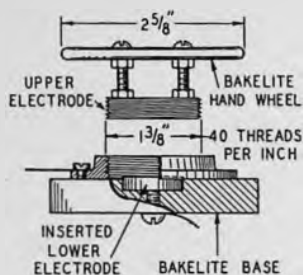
Crystal holder for permitting smooth and rapid frequency-shifting. The dimensions may be changed at will. The threaded upper electrode had better be longer and the stationary shell higher than shown to permit cutting windows as explained in the text.
